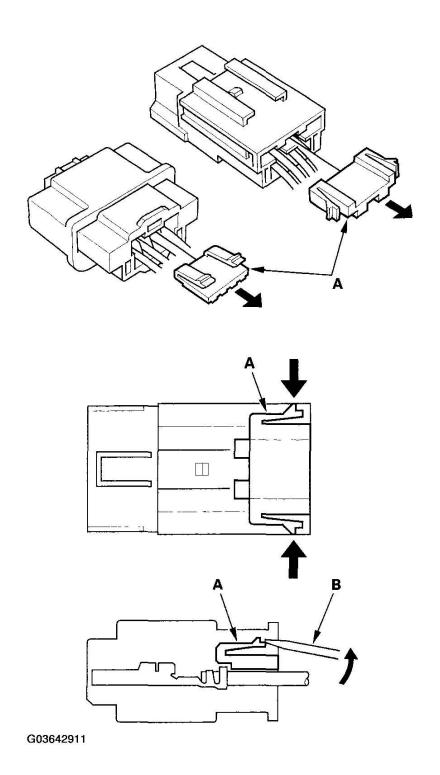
Inserting Screwdriver Between Connector Body And Retainer To Remove Courtesy of AMERICAN HONDA MOTOR CO., INC.
